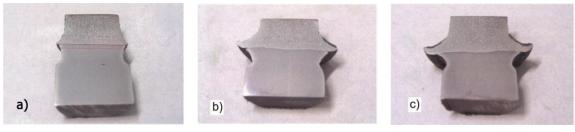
Macroscopical appearance of welded samples for different friction times
